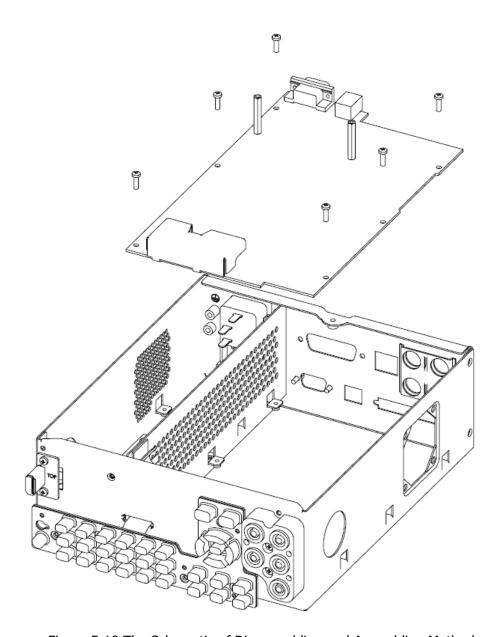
The Schematic of Disassembling and Assembling Motherboard
